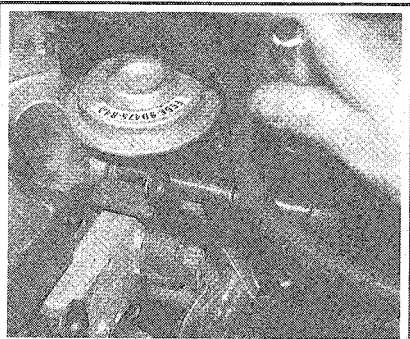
On the 4.6L engine, remove the nut and the brake booster bracket from the EGR mounting stud
